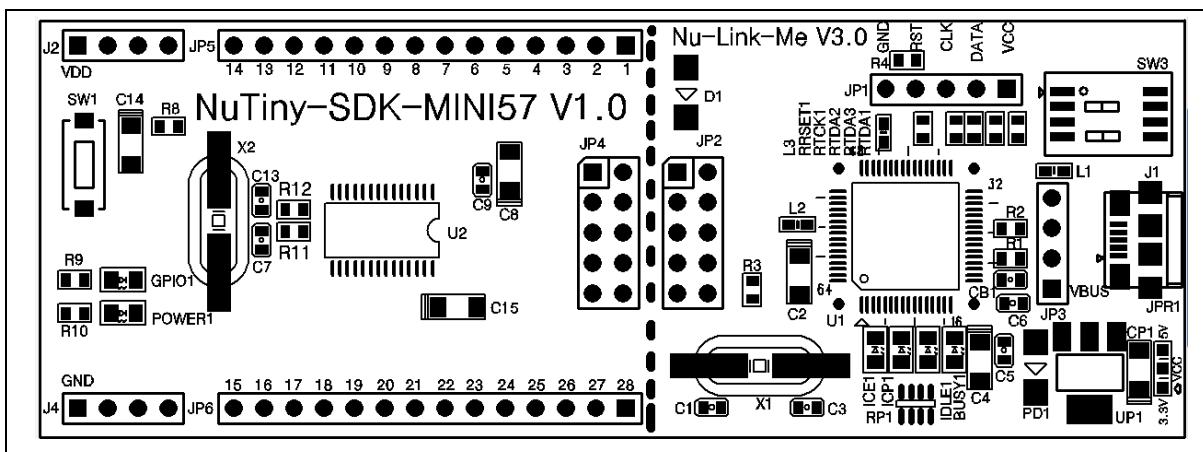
NuTiny-SDK-MINI57 PCB Placement
